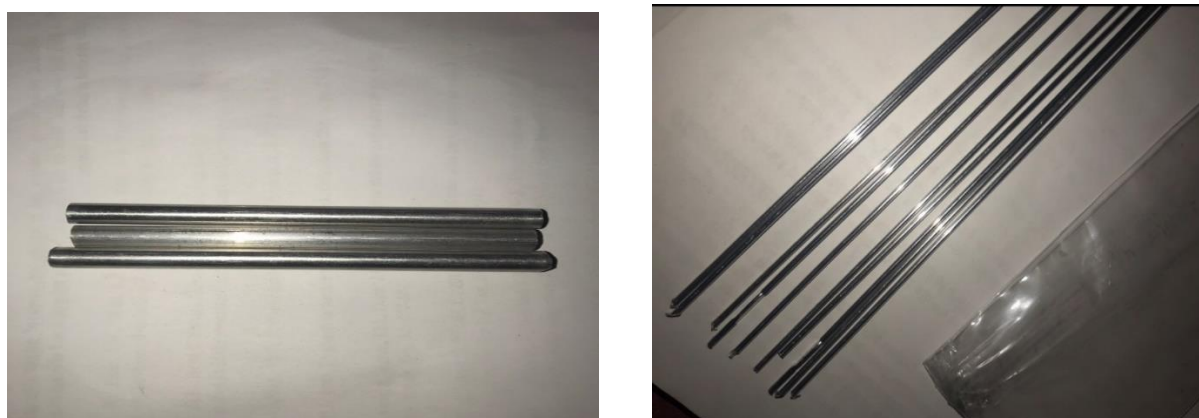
(a) Round bars of aluminium 6061 alloy (b) Aluminium 5356 filler metals/rods
